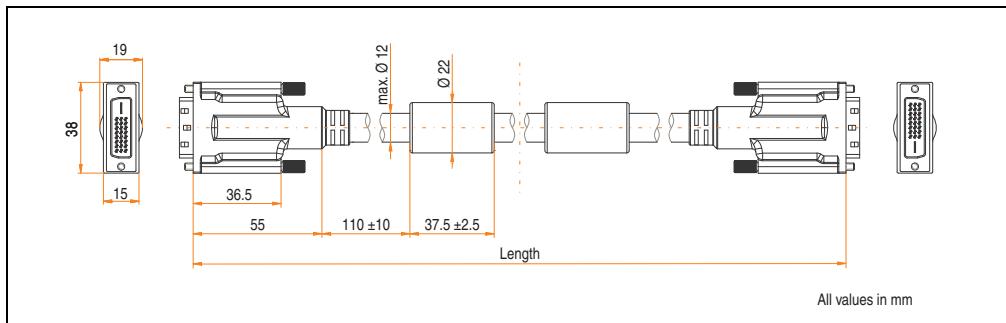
Dimensions - SDL cable 5CSDL.0xx-03
